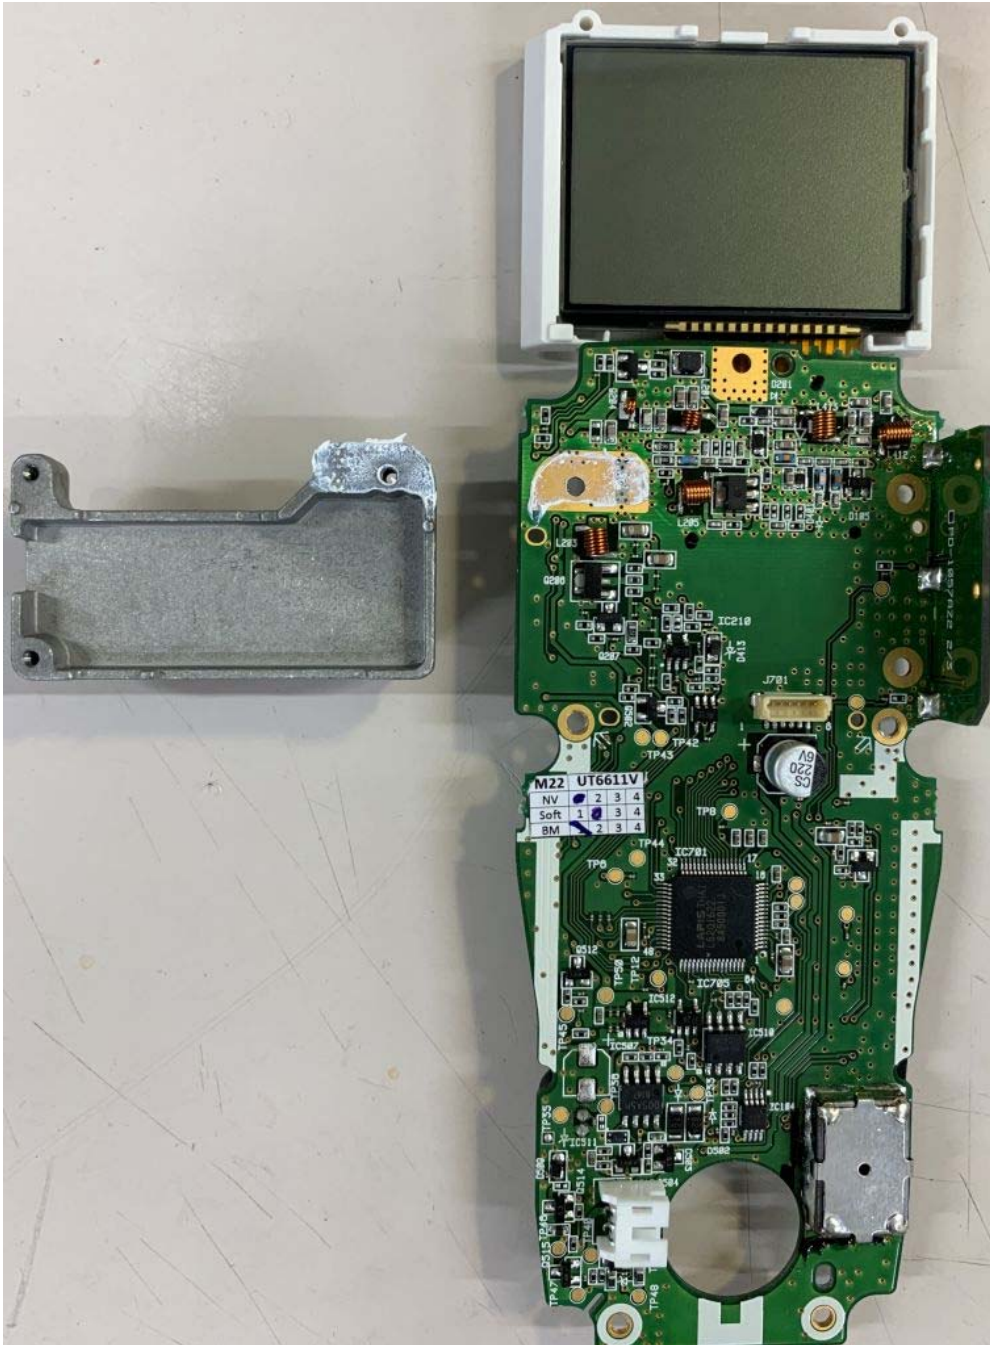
Internal Photo – Front Cover Removed – Main PCB Display Side
